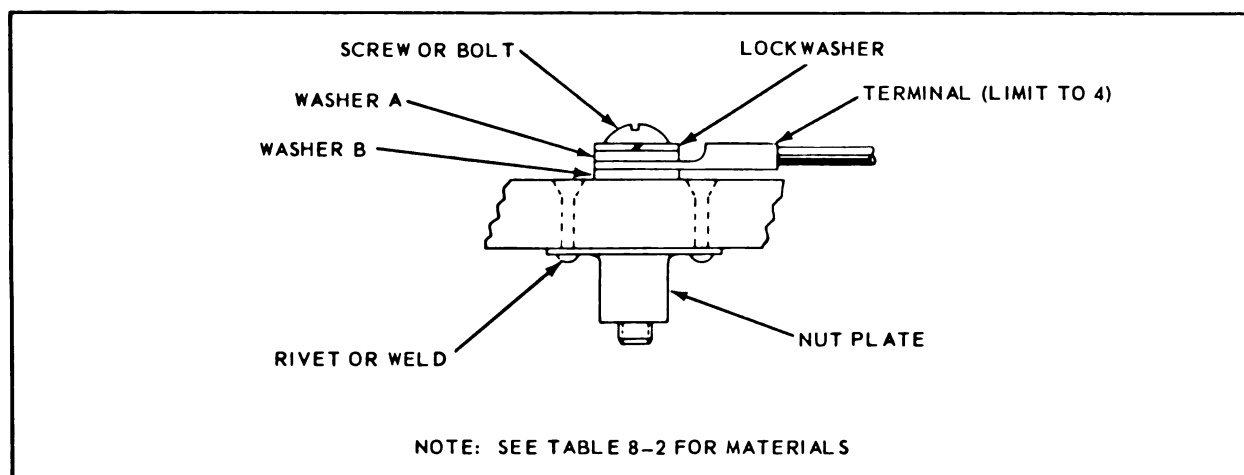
Plate Nut Bonding or Grounding to Flat Surface
